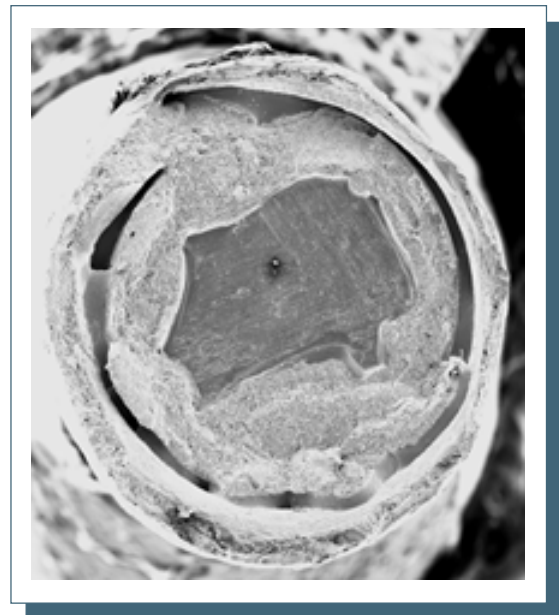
Fractography of a welded specimen broken by tensile test: overall view.
